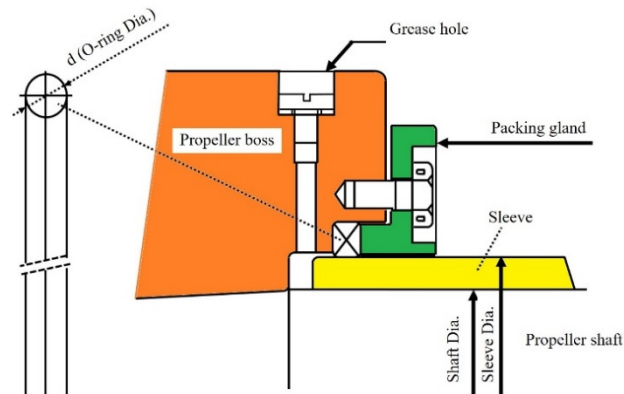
An O-ring and grease layer providing two-layer protection against sea water coming into contact with the unprotected propeller shaft surface.
